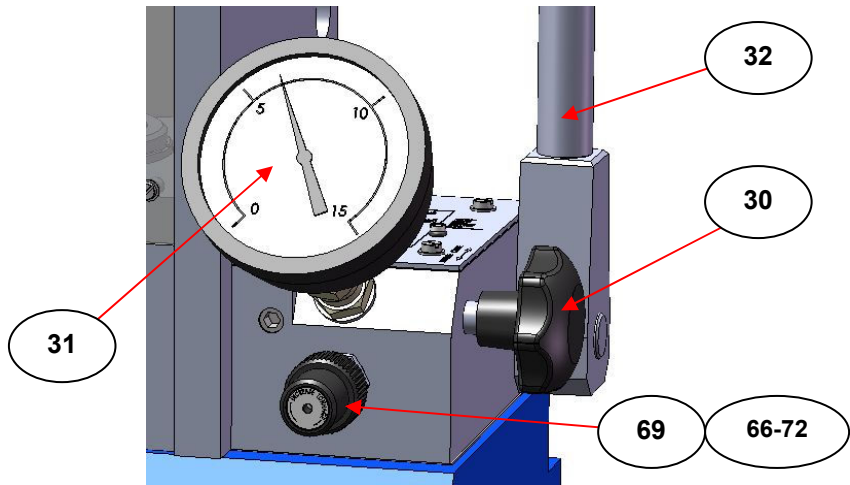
Pressure Relief Valve for Setting a Maximum Load
